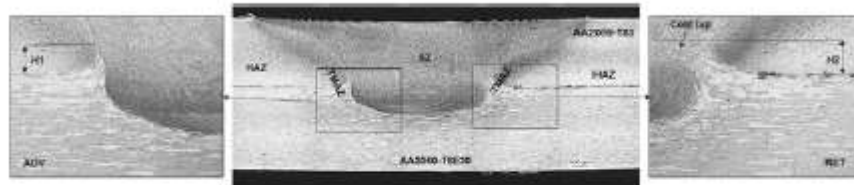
Cross-section of FSW lap joint produced at 1200 rpm and 250 mm/min by a tool with three flats
